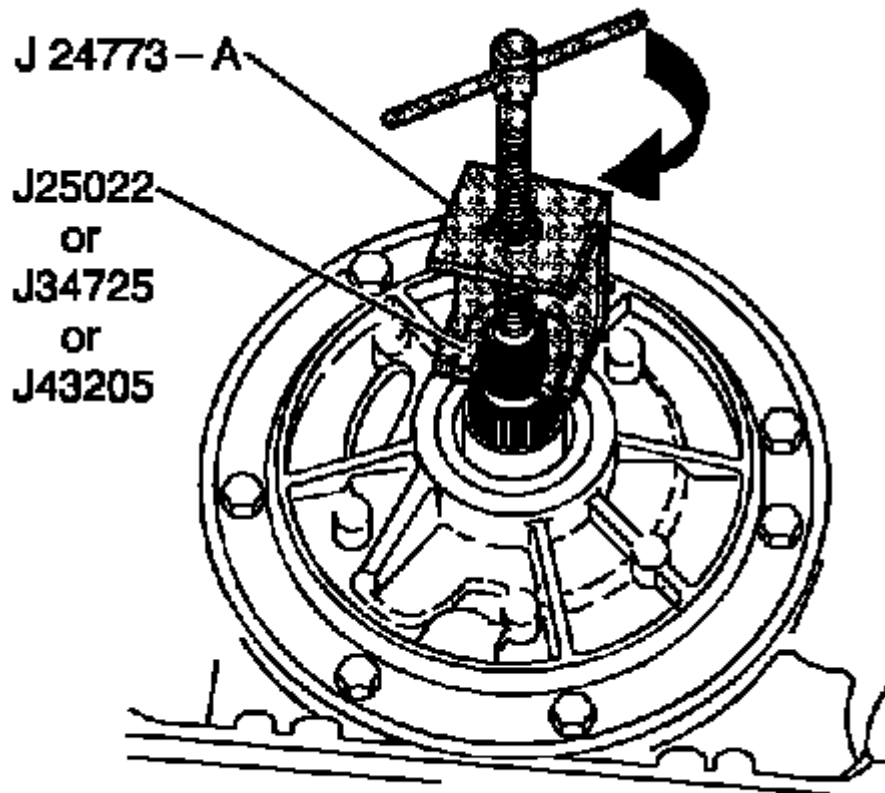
Retainer Ring On Intermediate Clutch Spring Assembly
